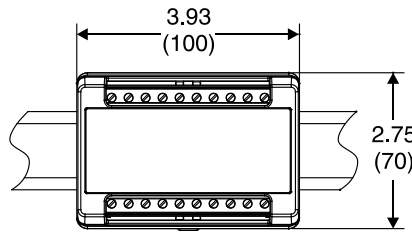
Wide Case Size in Inches (millimeters) (Front View)
